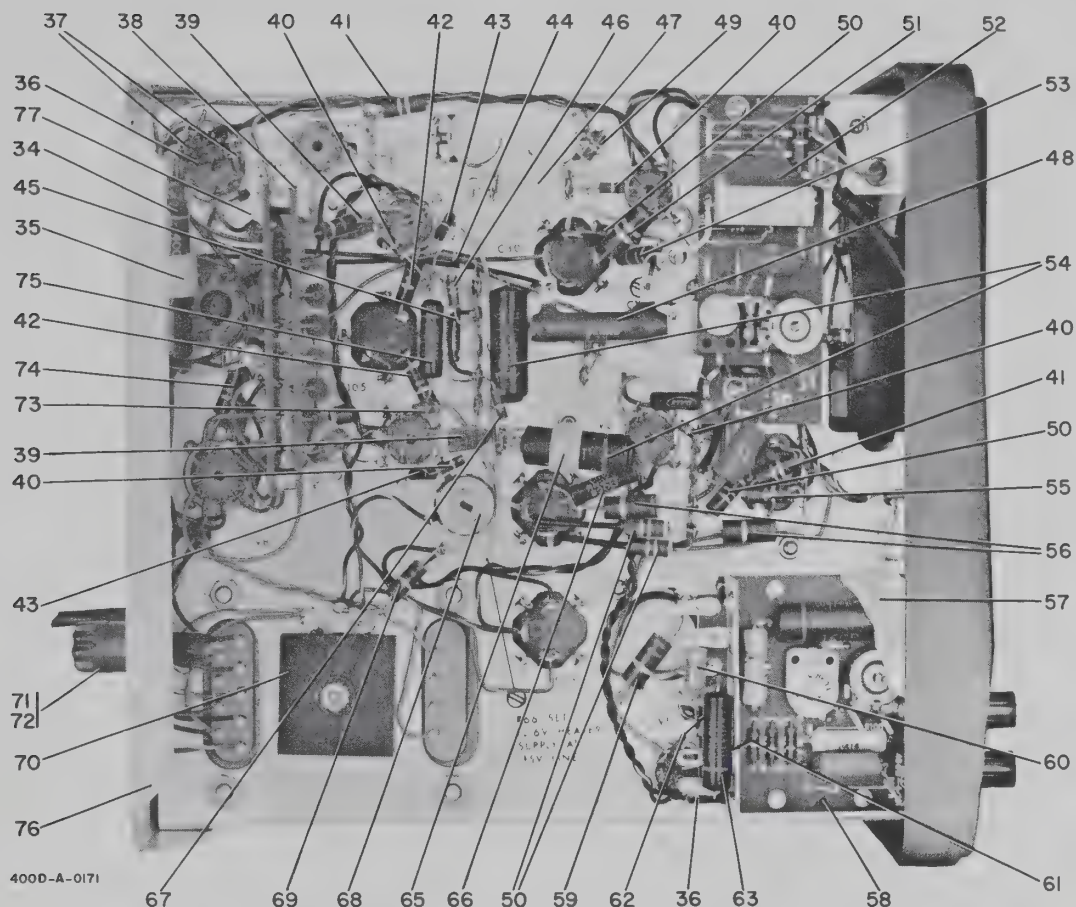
Main Chassis Assembly (Sheet 2 of 2)
